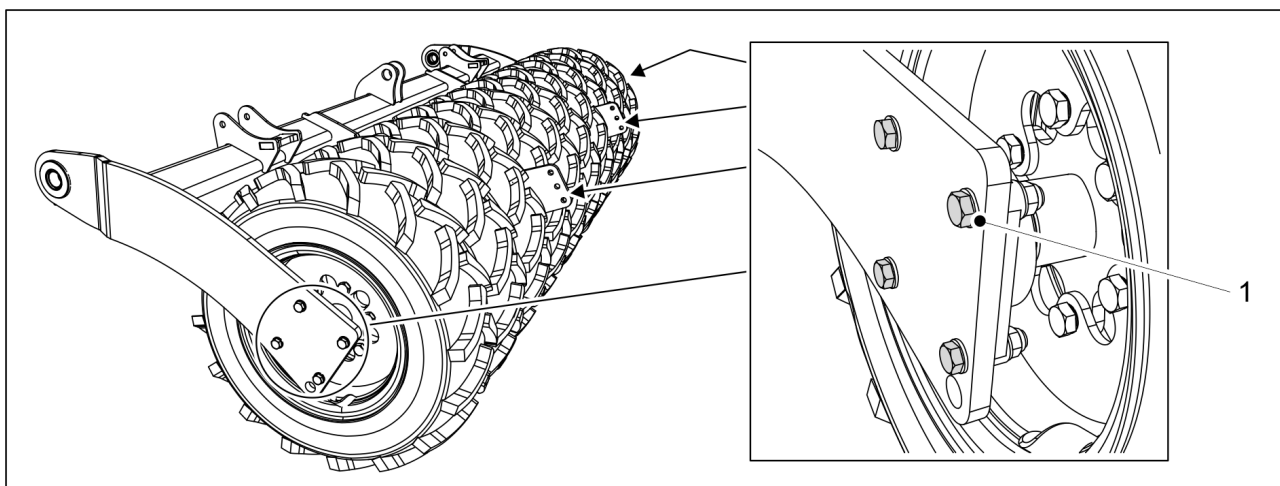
213. The flange bearing bolts of the transport wheels
